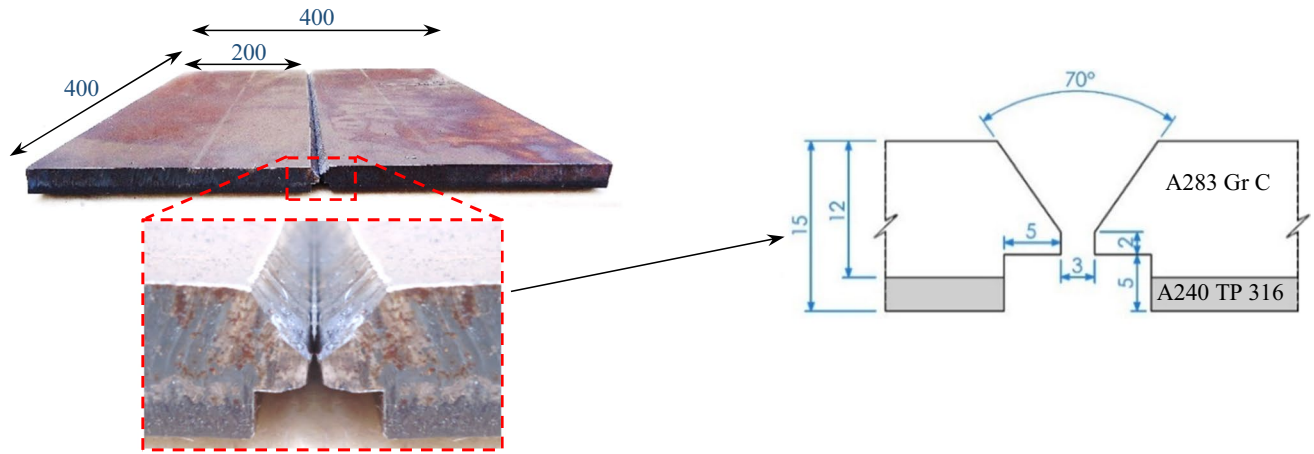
Form and dimensions of the prepared plates and the butt-weld U-V shape for welding process
